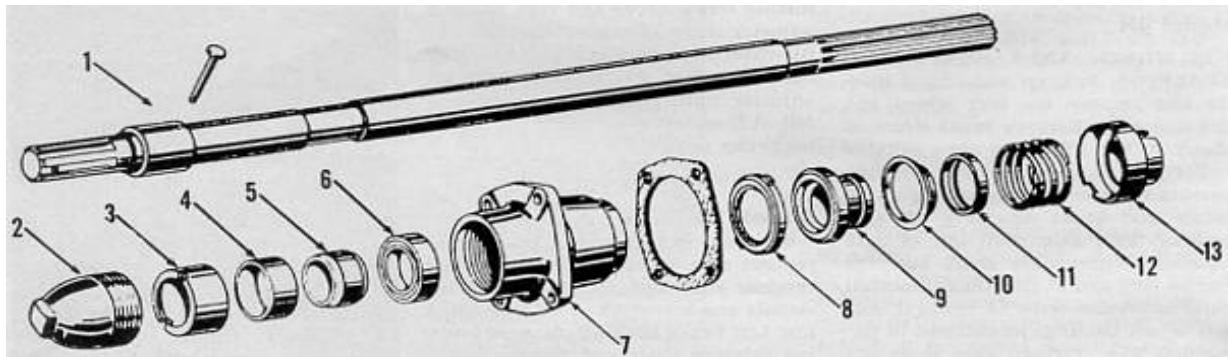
Power take-off shaft assembly as used on models 9N and early production 2N models. An adapter mounted aft of the shaft enables use of standard ASAE couplings.
